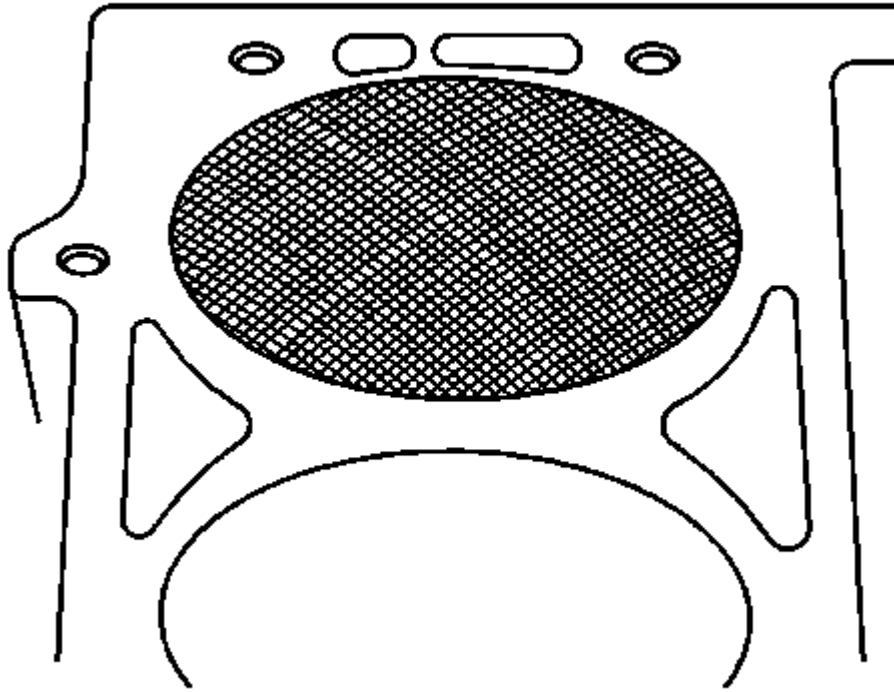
Identifying Cylinder Bore Cross Hatch Pattern
